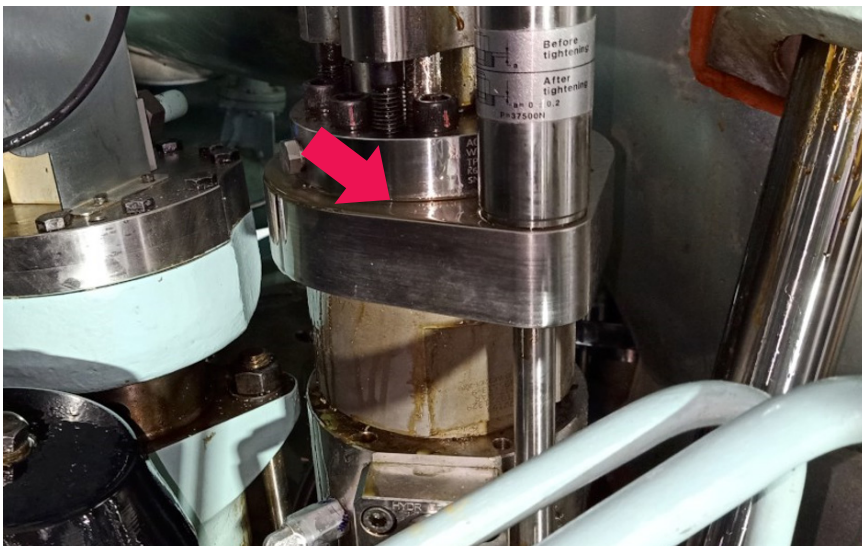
Pilot oil and fuel booster injection valve (PBIV) top cover leakage
